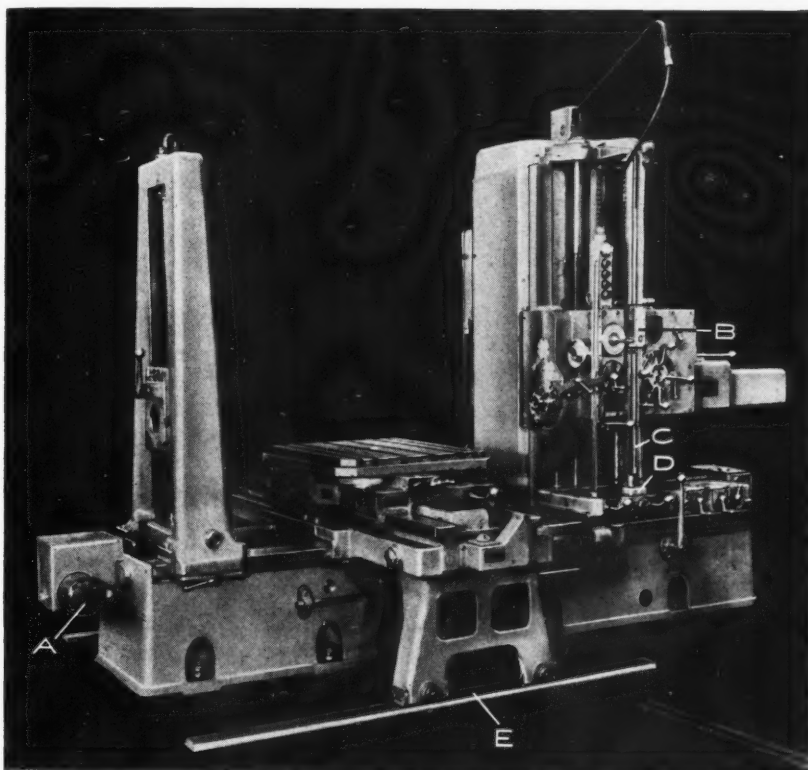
New Giddings & Lewis rotary table type horizontal boring, drilling, and milling machine equipped with automatic positioning device
